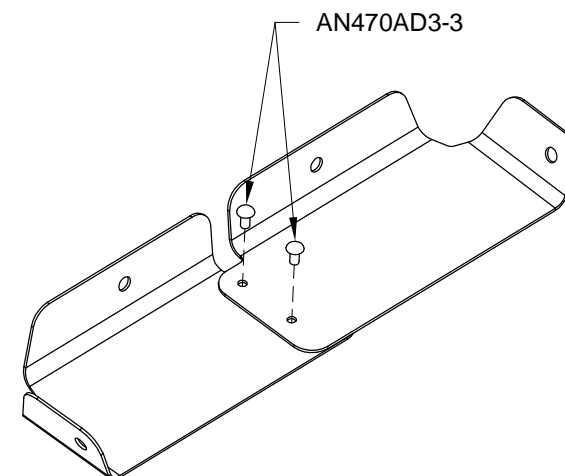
RIVETING THE FF-00126A ASSEMBLY
